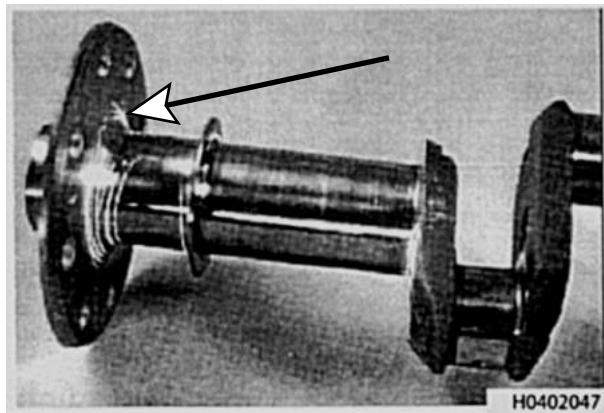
Fluorescent Magnetic Particle Indications of Cracks in Crankshaft of Small Aircraft Engine Damaged in Plane Accident
